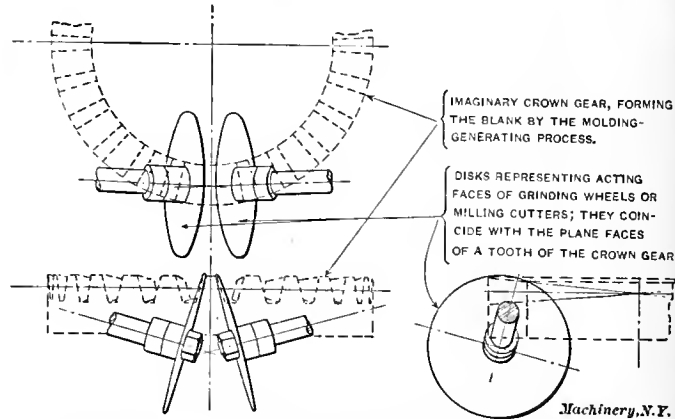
Diagram suggesting the Arrangement of Milling Cutters or Grinding Wheels for Forming the Teeth of Bevel Gears by the Molding-Generating Process.
